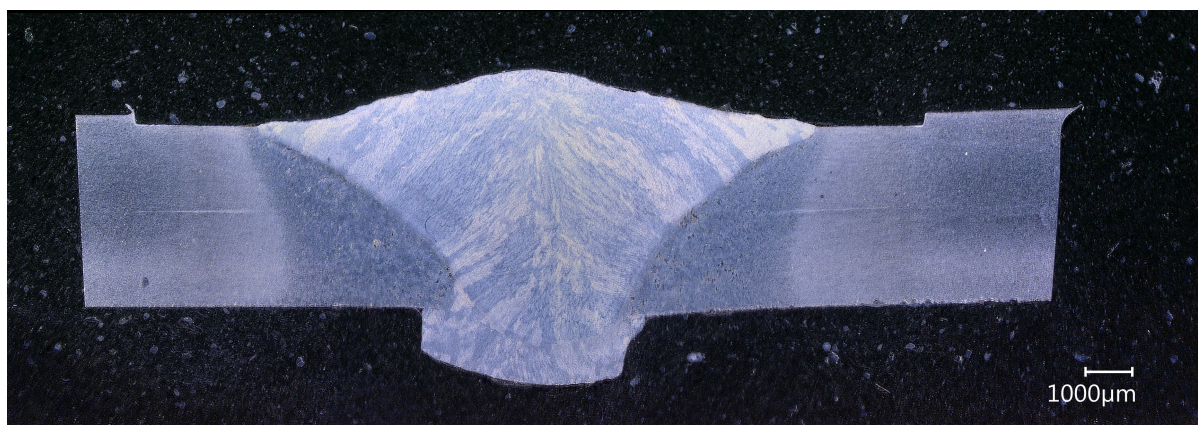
Cross-sectional specimen of the repaired weld.
